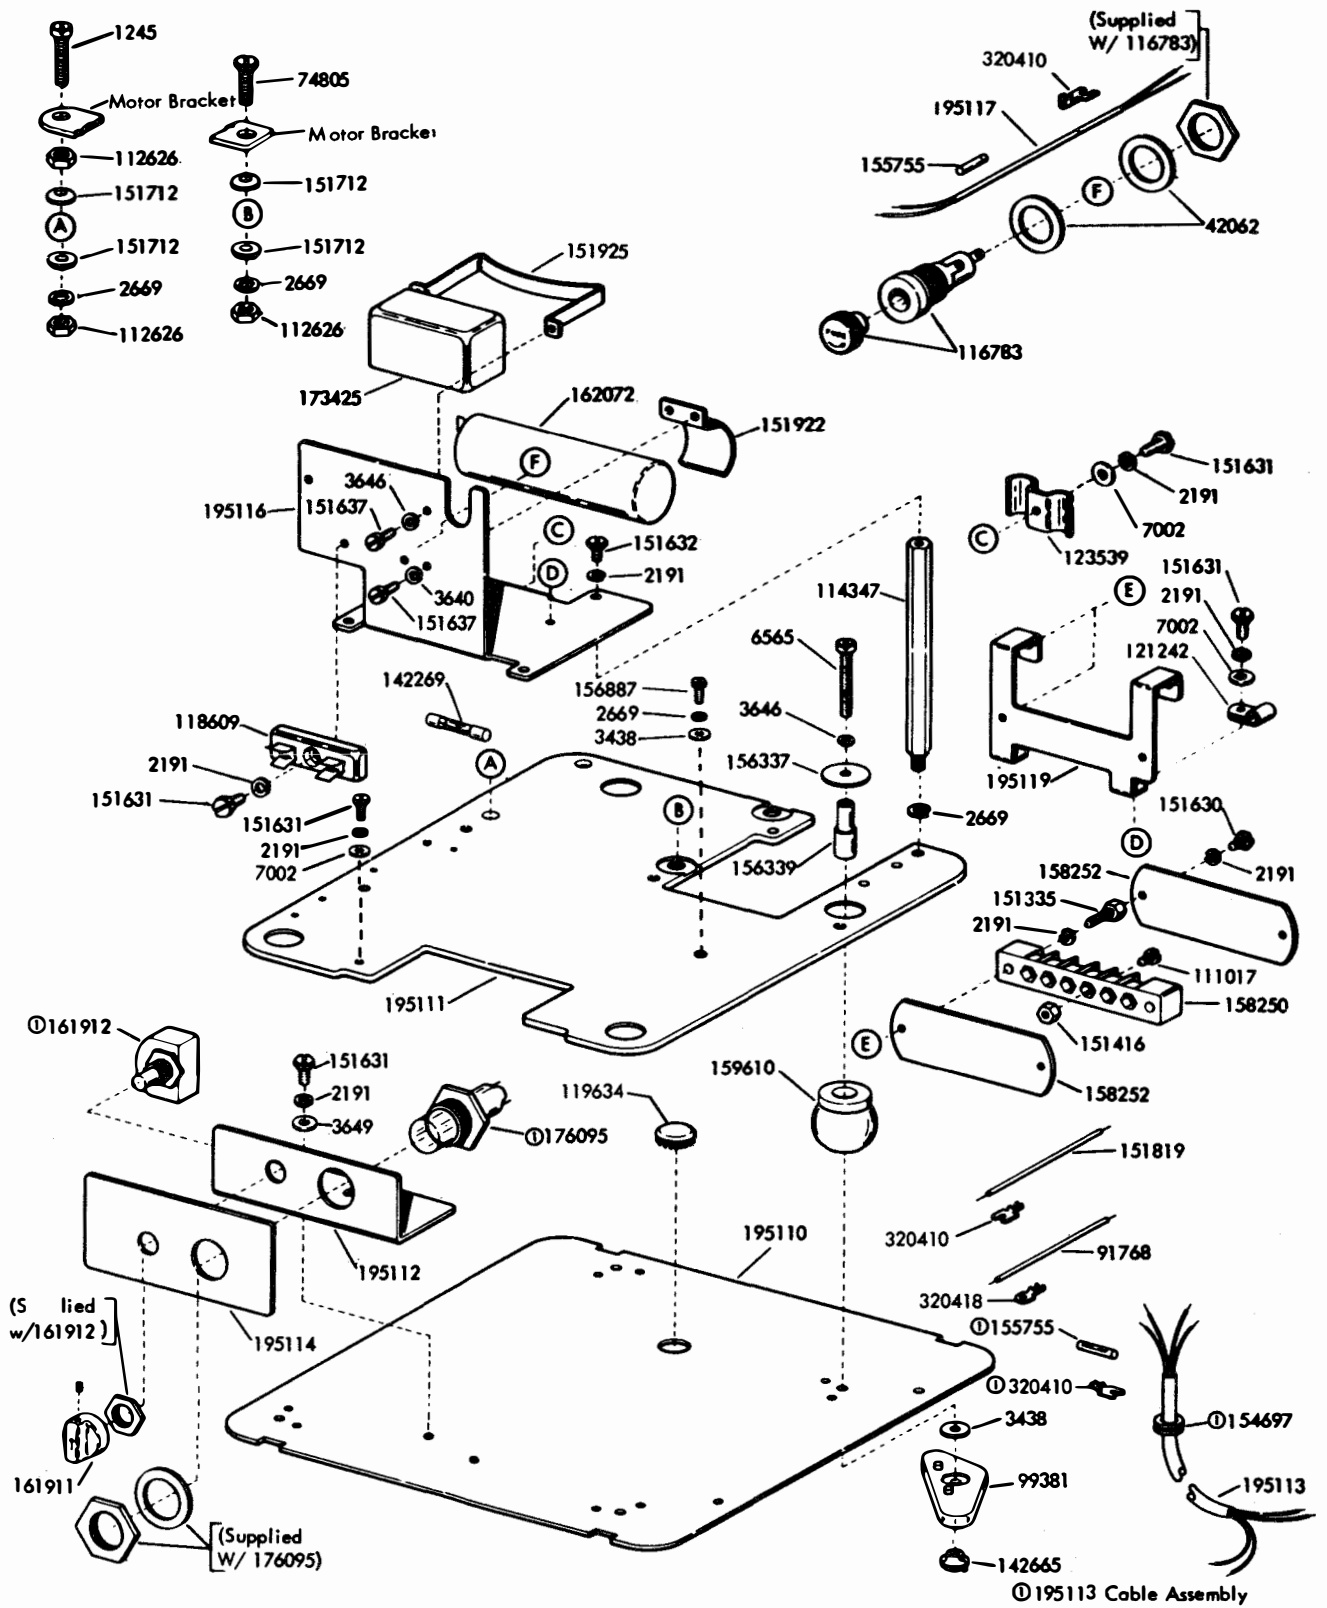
Compact Tape Printer Base (Sheet 1 of 2)
